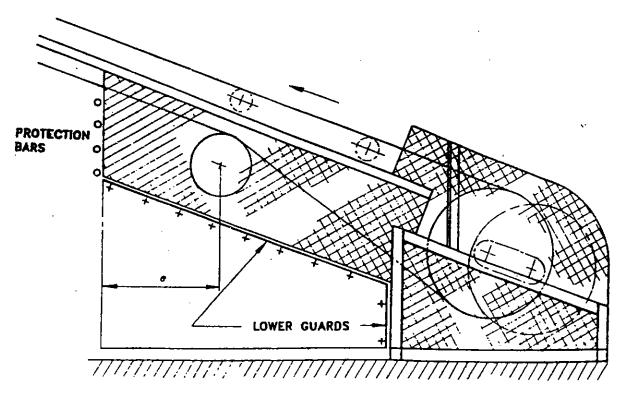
FULL ENCLOSURE AT THE TAIL END OF A BELT CONVEYOR
